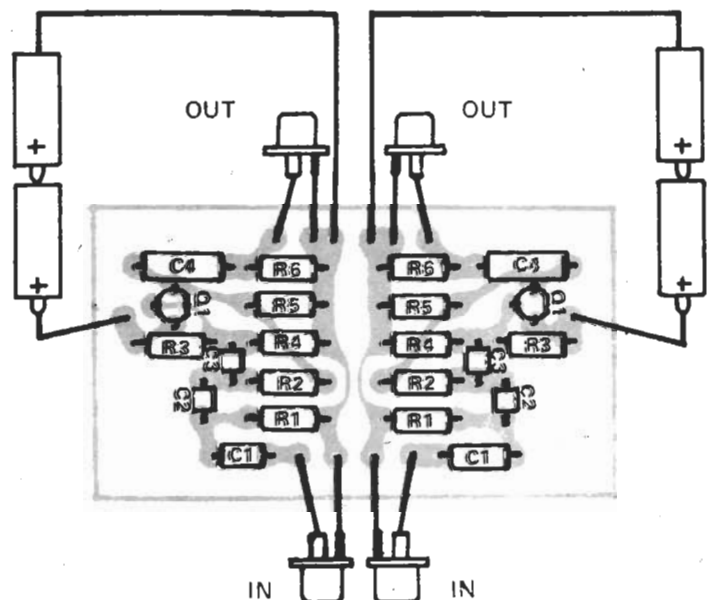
Printed circuit board layout for the rumble filter 40mm x 70mm.
